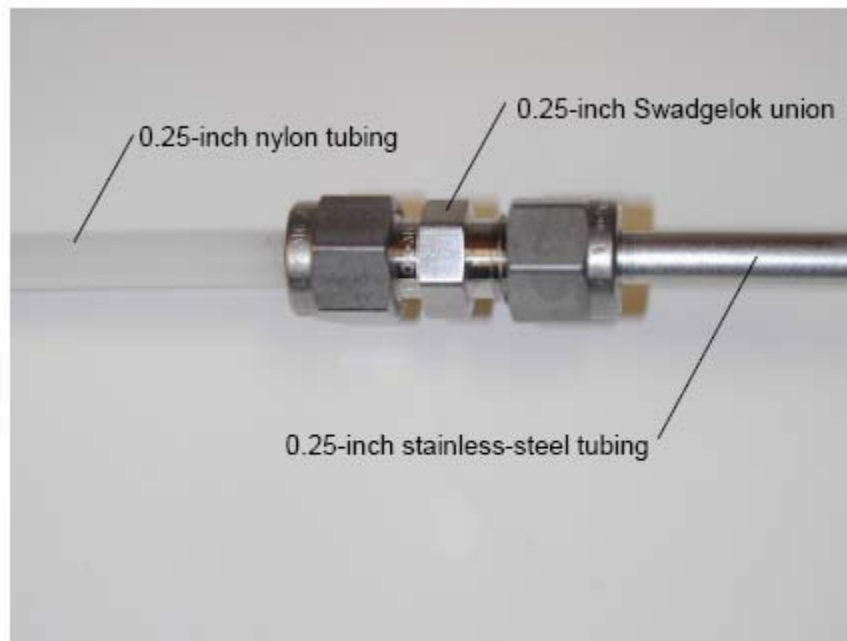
Photograph of a typical Swagelok pressure-tight fitting used to connect tubing.
